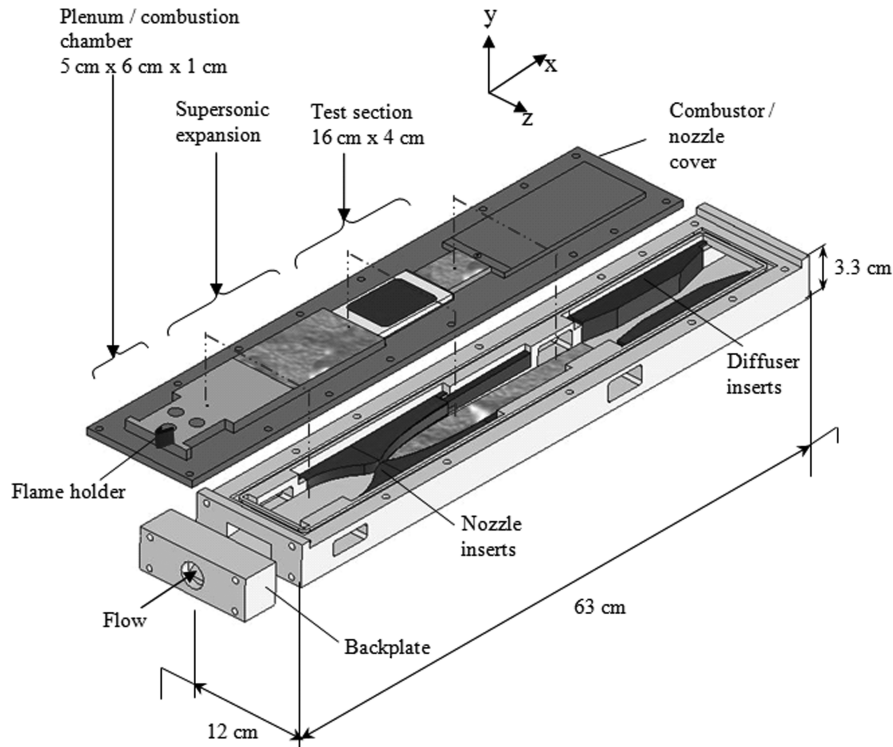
Overall view of the combustor/nozzle/test section/diffuser assembly.
